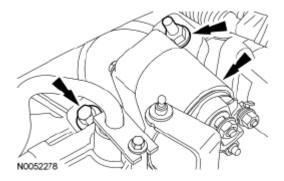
Locating Stud Bolt And Starter Courtesy of FORD MOTOR CO.
